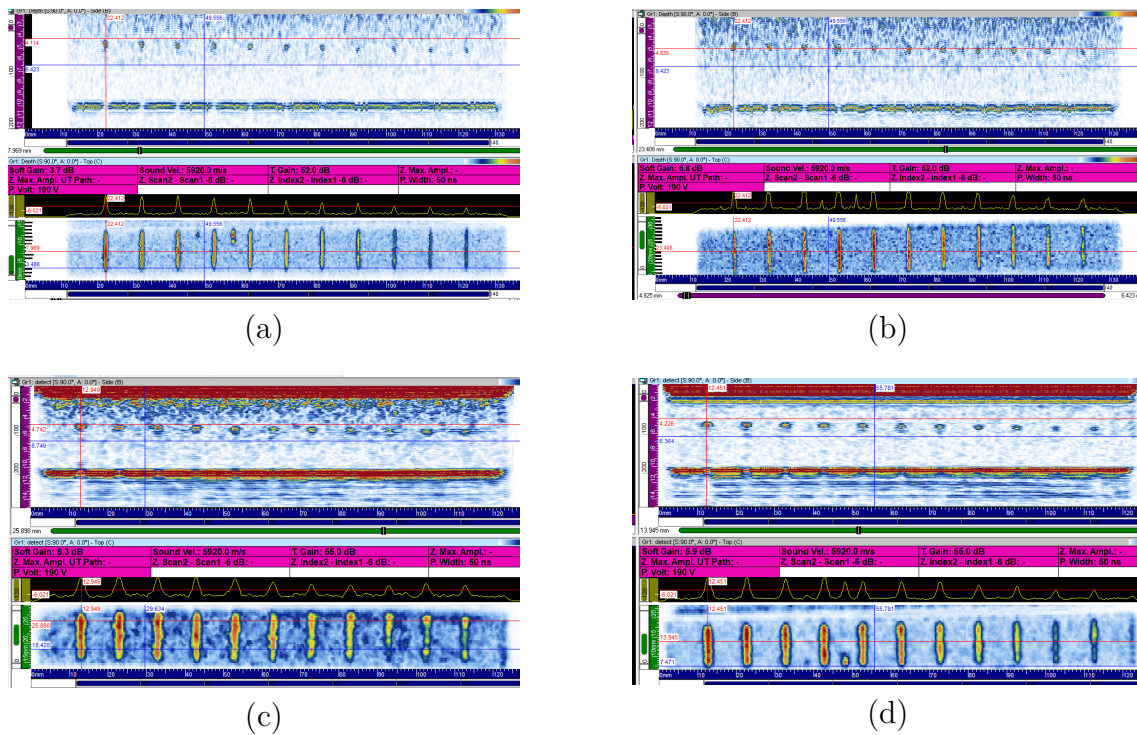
UT results of 1.0 mm printed holes in machined and unmachined Alloy 247 using 2.5" and 3.25" probes in Blocks I and II. (a) Machined, 2.5" probe, (b) Unmachined, 2.5" probe, (c) Unmachined, 3.25" probe, (d) Machined, 3.25" probe. Top: B-Scan; Bottom: C-Scan with echo dynamic curve showing maximum amplitude at the printed hole.
